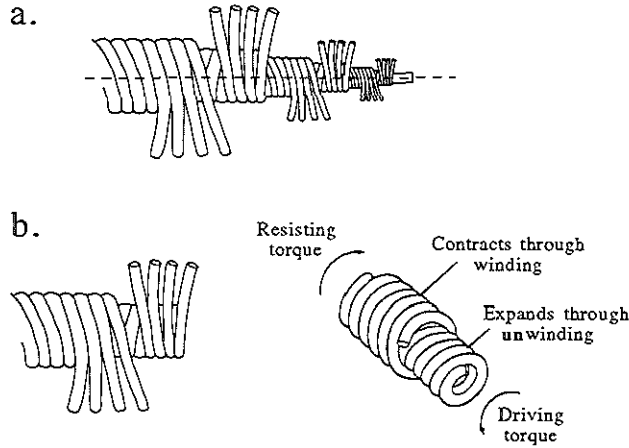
Spiral type drive-shaft with counter-wound layers of multi-filament spirals. Multi-layer configuration (a), two-layer configuration (b) [17].
